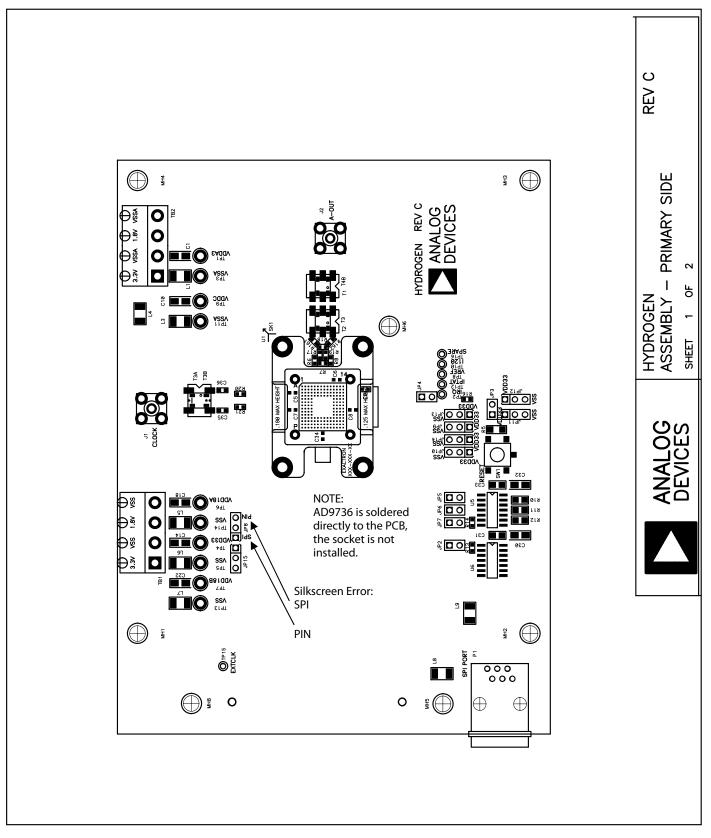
PCB Layout Top Placement, AD9736 Evaluation Board, Rev C
